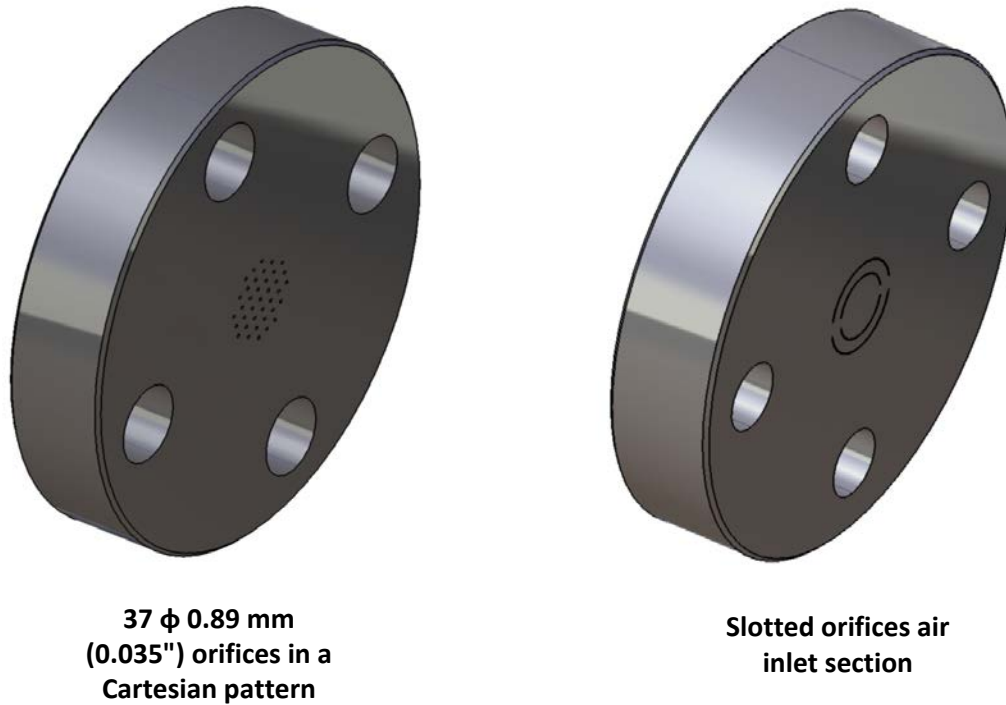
Inlet air section configurations: circular holes in a Cartesian pattern (left) and slotted choked orifices for ease of modeling (right). Both parts are machined in a 1" (25.4 mm) 600-lb blind pipe flange
